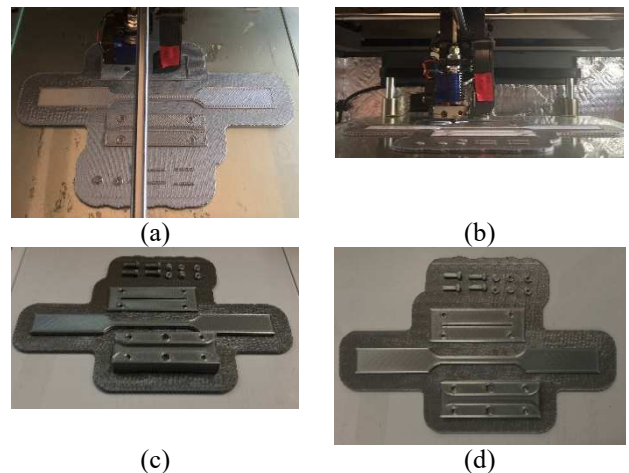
Manufacturing of the mock-up of the special tool: a) and b) manufacturing phase, c) and d) job finished with all parts
